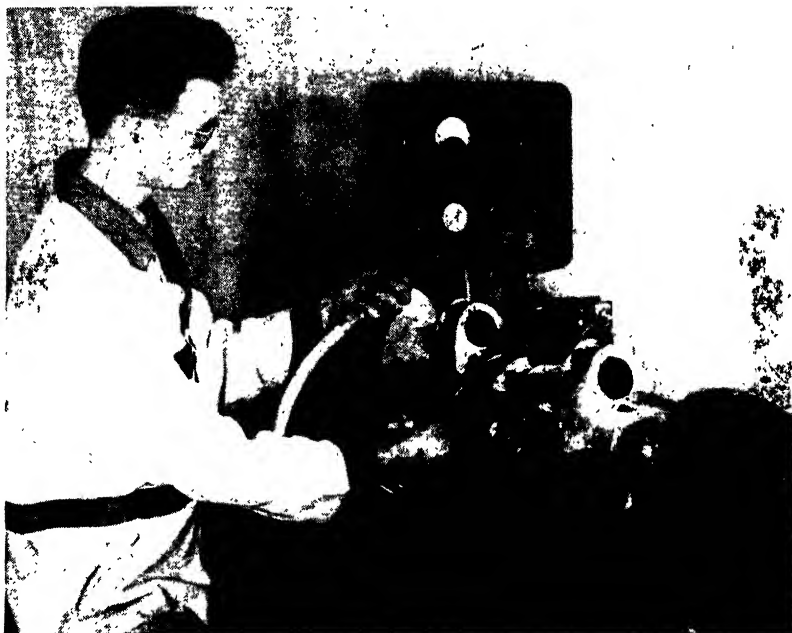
2. Magnetic inspection of crankshaft. (Courtesy of Magnaflux Corporation.)
